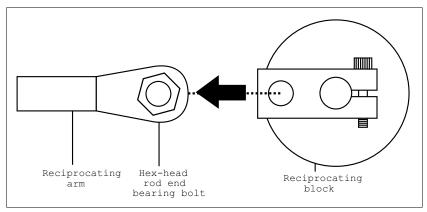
Disabling the Shuttle from Inside the Access Panel
